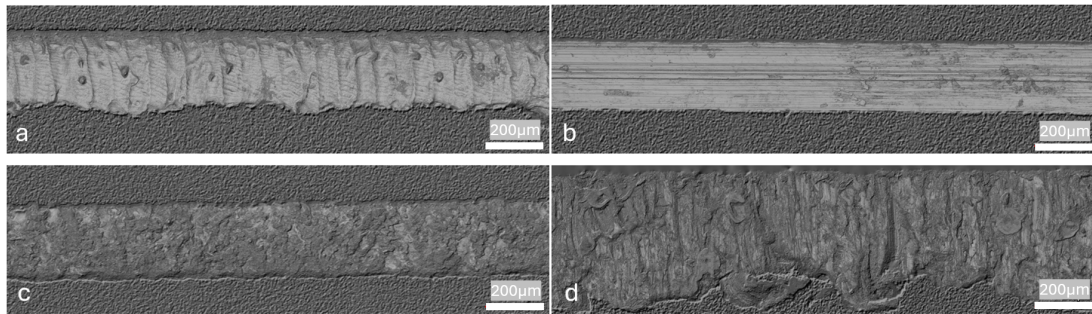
Images of the cutting edge of: a) Laser Cut, b) Milling Cut, c) EDM cut, and d) Water Jet cut.
